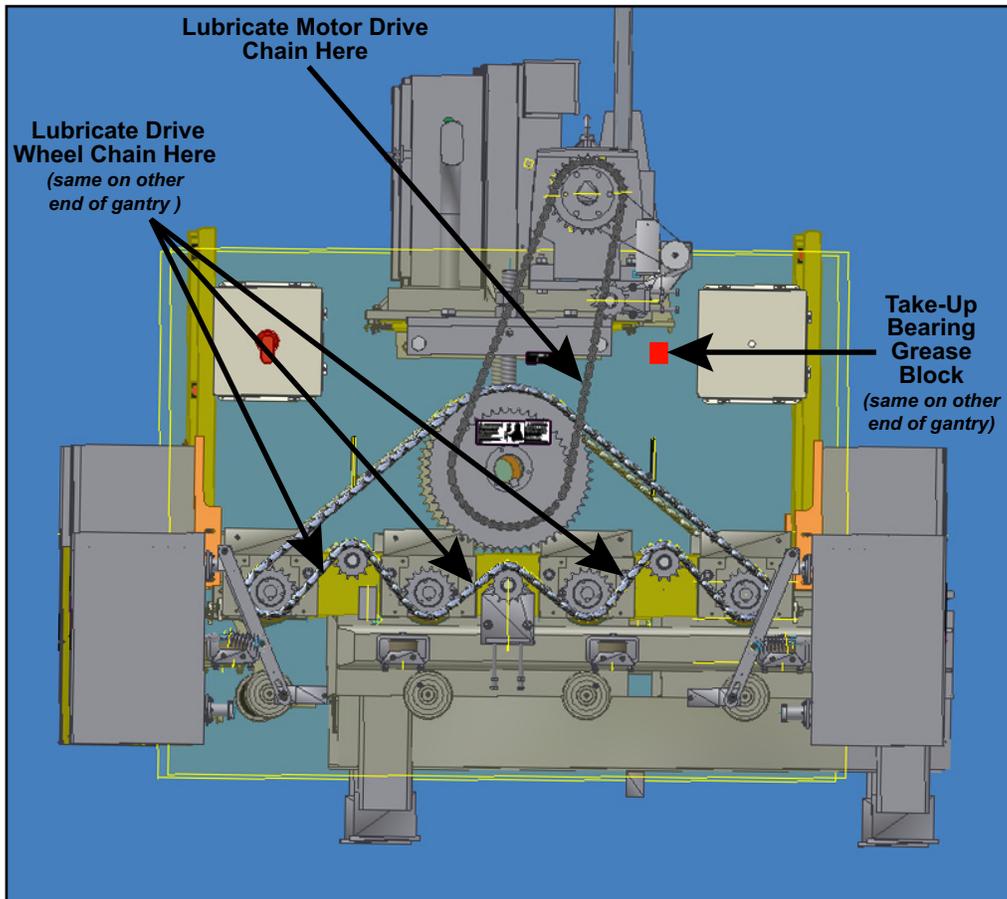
Bearing Lubrication Points, One End of Gantry Head
